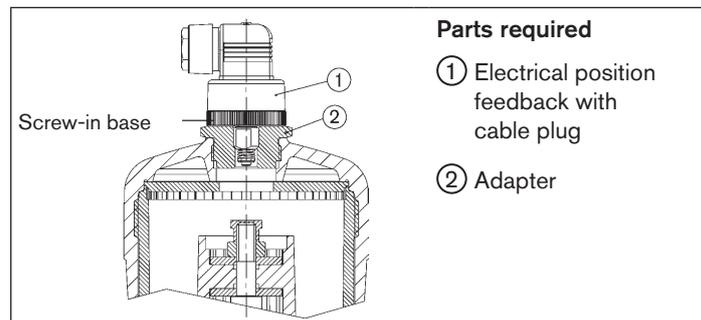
Actuator size 50, 63, 80 (Ø in mm) with electrical position feedback
